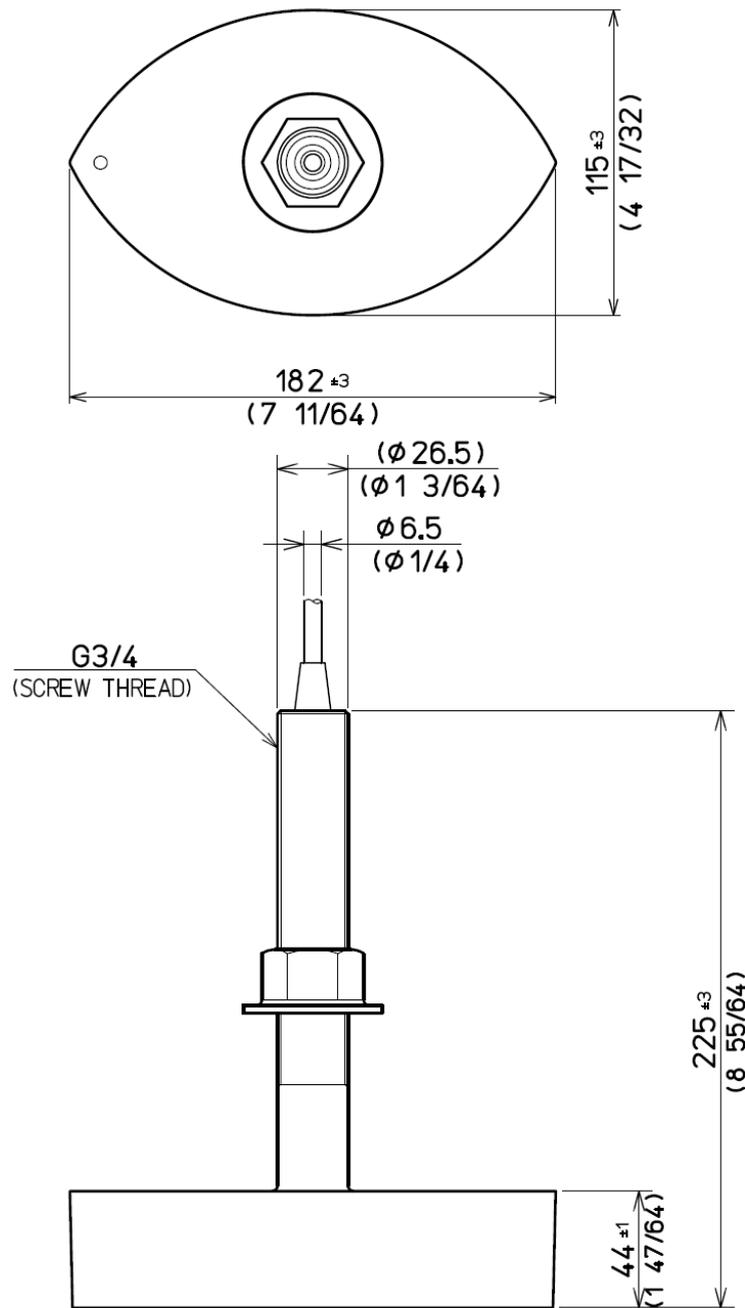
Outline dimensions of a transducer (TD-501T-3B)
